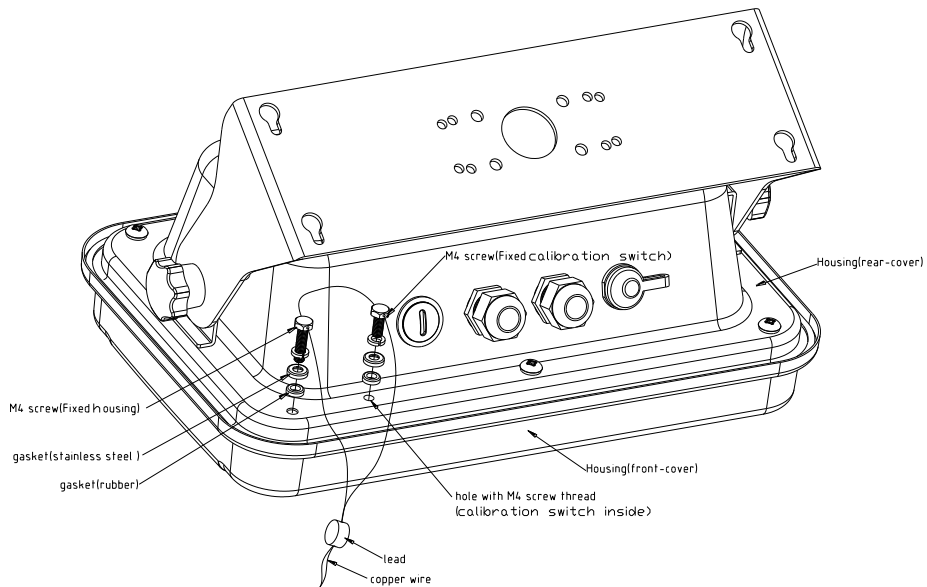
Sealing of S7-20 / S7-40 / S7-50 / S7-60 indicators with wire and seal (type B).
